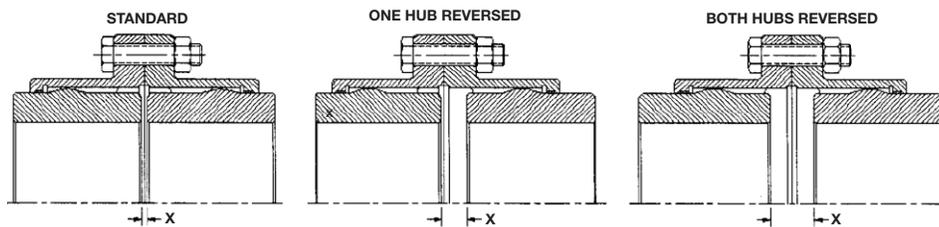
"X" Dimension Between the Driver and Driven Hub Ends
